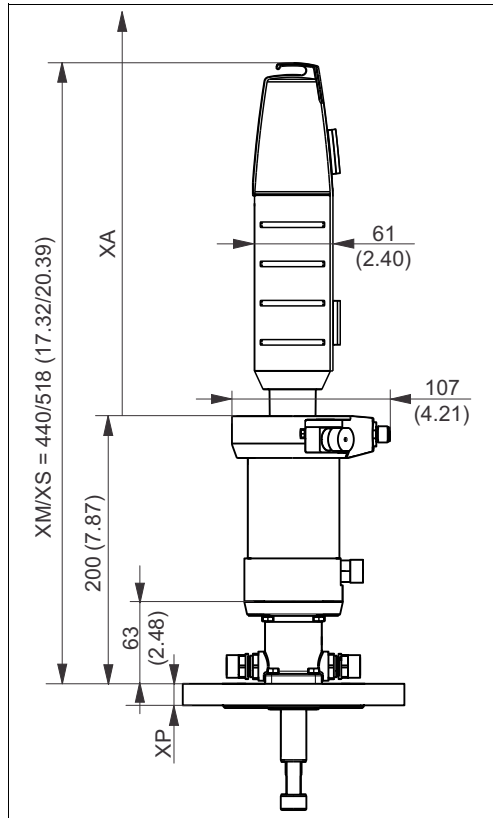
Pneumatic drive, long version, dimensions in mm (inch)
